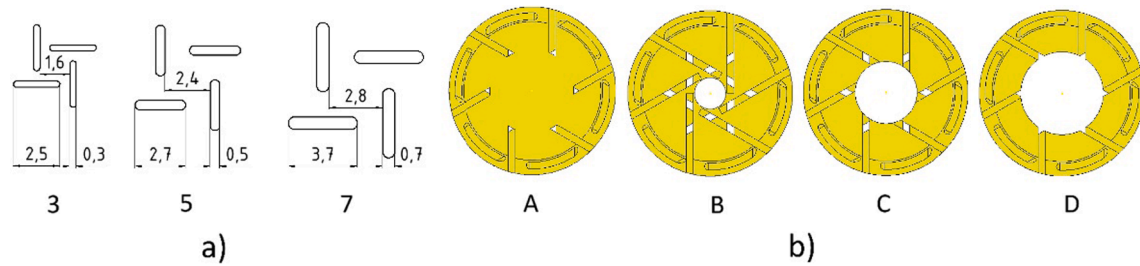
Dimensions (in mm) of auxetic inclusion (a) and cross-sectional geometries (b) of dowels.
